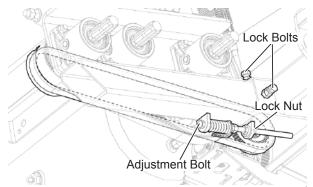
Left Draper Drive Belt 1 Tension Adjustment
